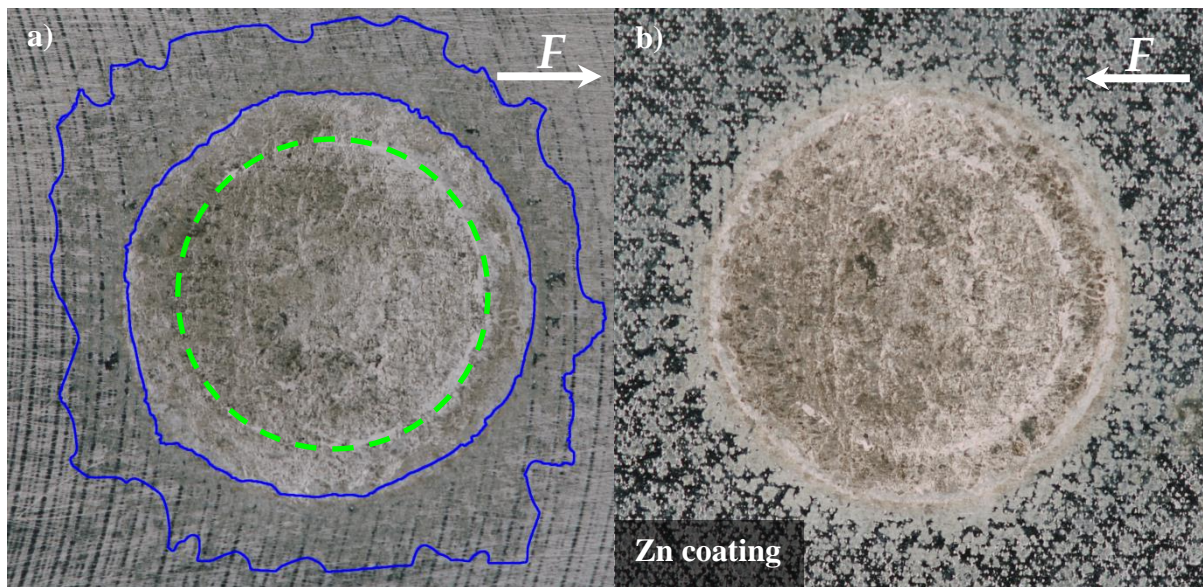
Photography of typical interfacial failure surface after lap shear test, in a joint produced with: RS= 1800 rpm, PD= 2.5 mm, PT= 1.5 s, DT=1 s and RT= 1.5 s. a) Failure surface of the Mg sheet bottom view. b) Failure surface of the steel top view.
